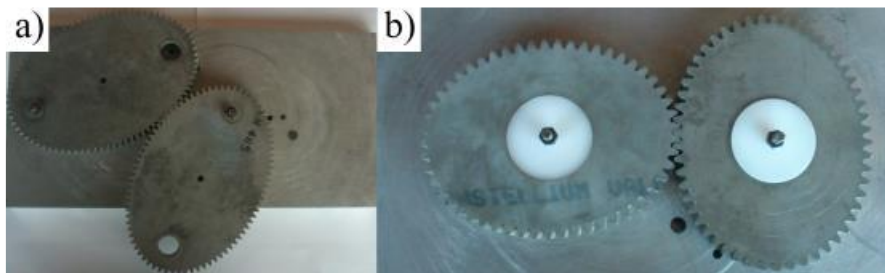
Two manufactured gears; a) elliptical; b) oval.
